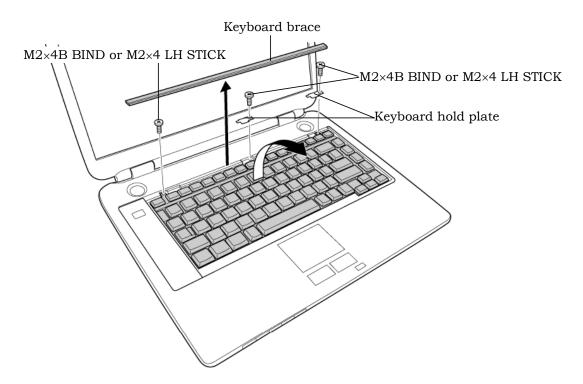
Removing the keyboard brace and keyboard hold plate
